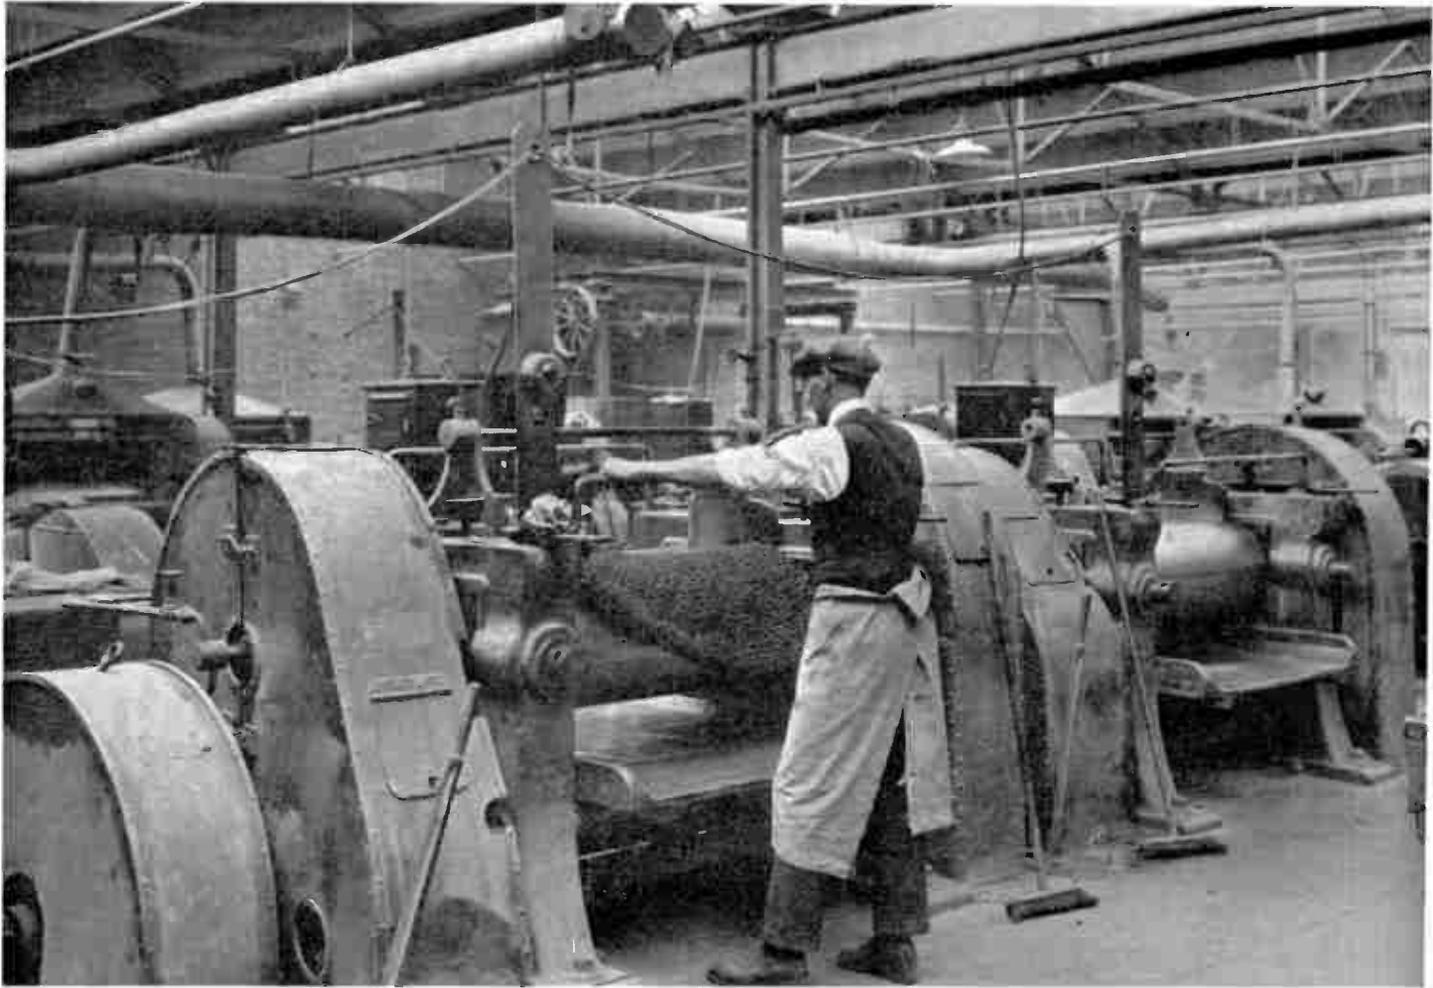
MASTICATING THE RAW RUBBER AND MIXING VARIOUS INGREDIENTS.—(*St. Helens Cable and Rubber Co., Ltd.*)
